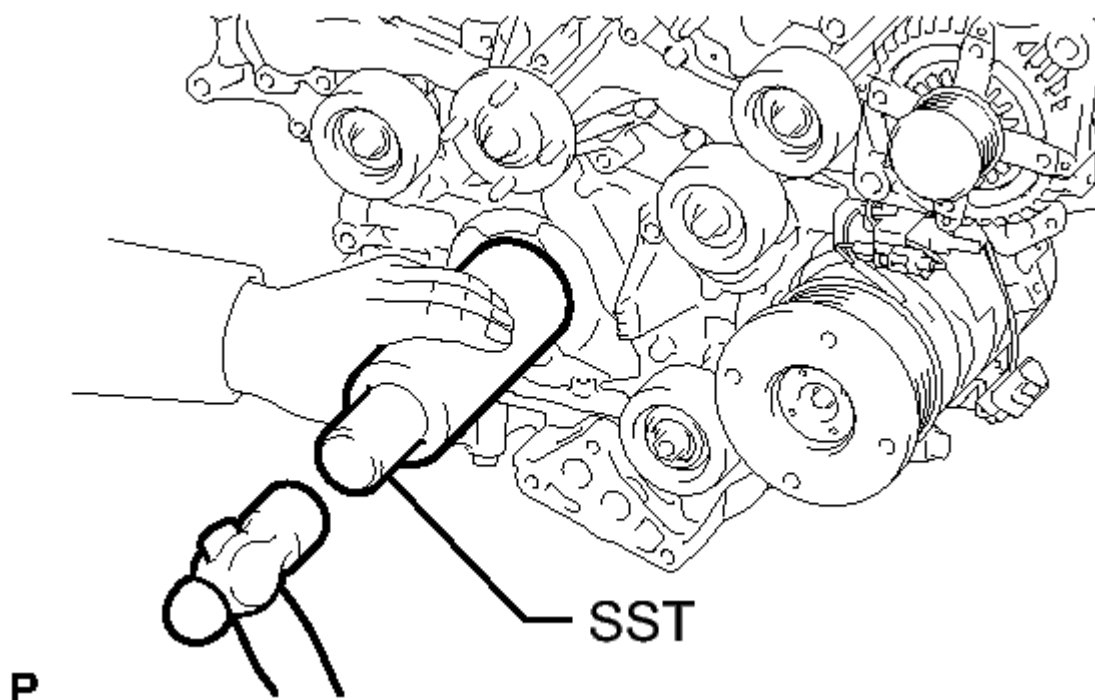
Identifying Front Crankshaft Oil Seal, SST And Hammer
